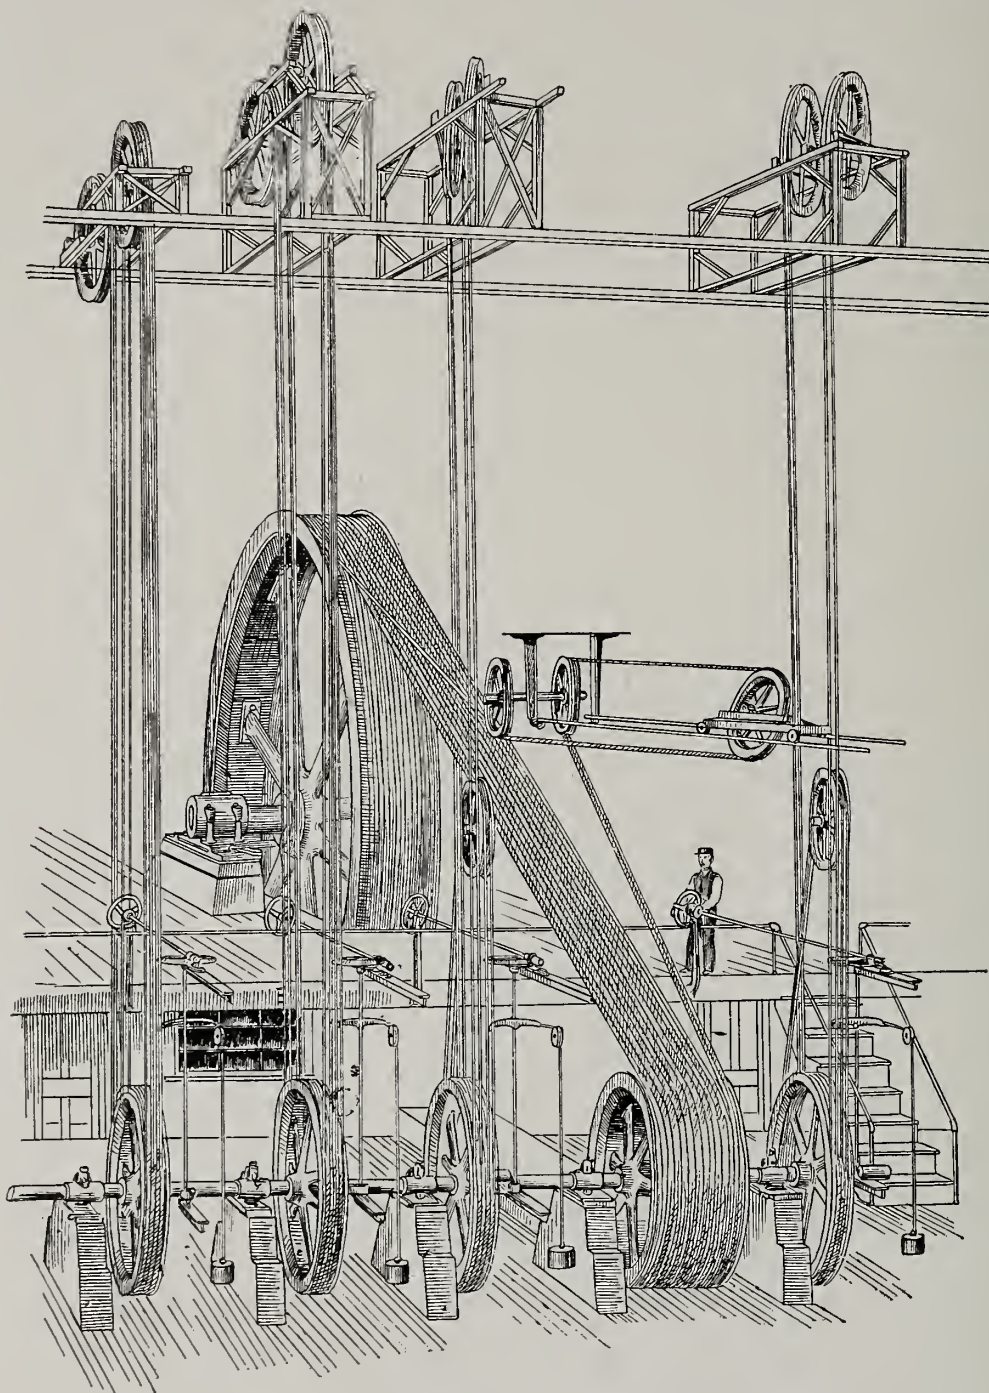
FLY-WHEEL OF ENGINE, SHOWING ROPE DRIVE.
